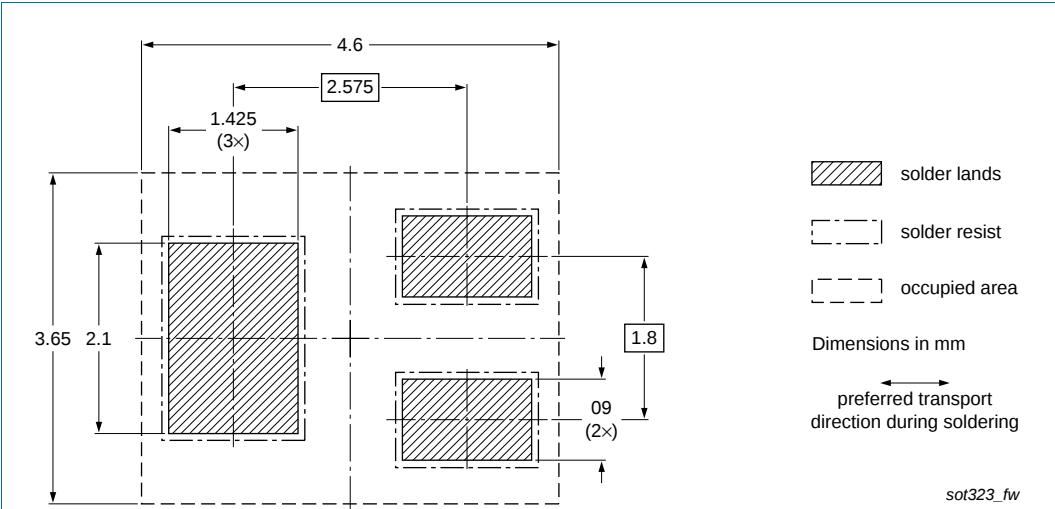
Wave soldering footprint BAS16W (SOT323/SC-70)
